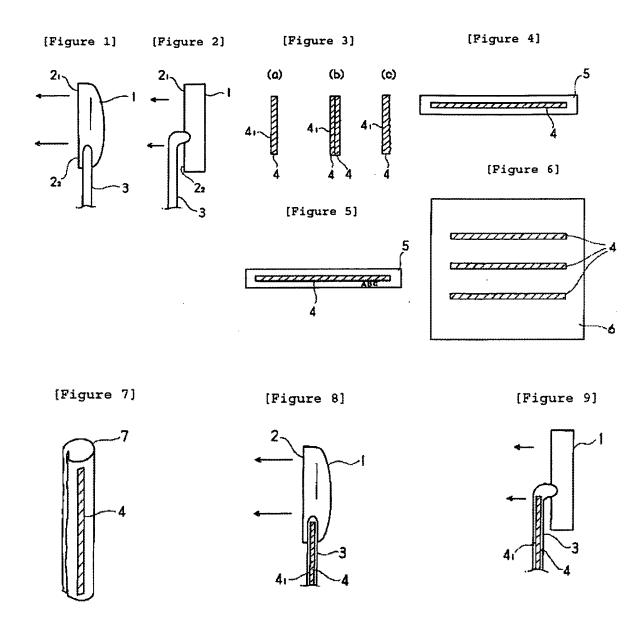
A drawing showing an example in which a tape is stuck into the shape of a film.
